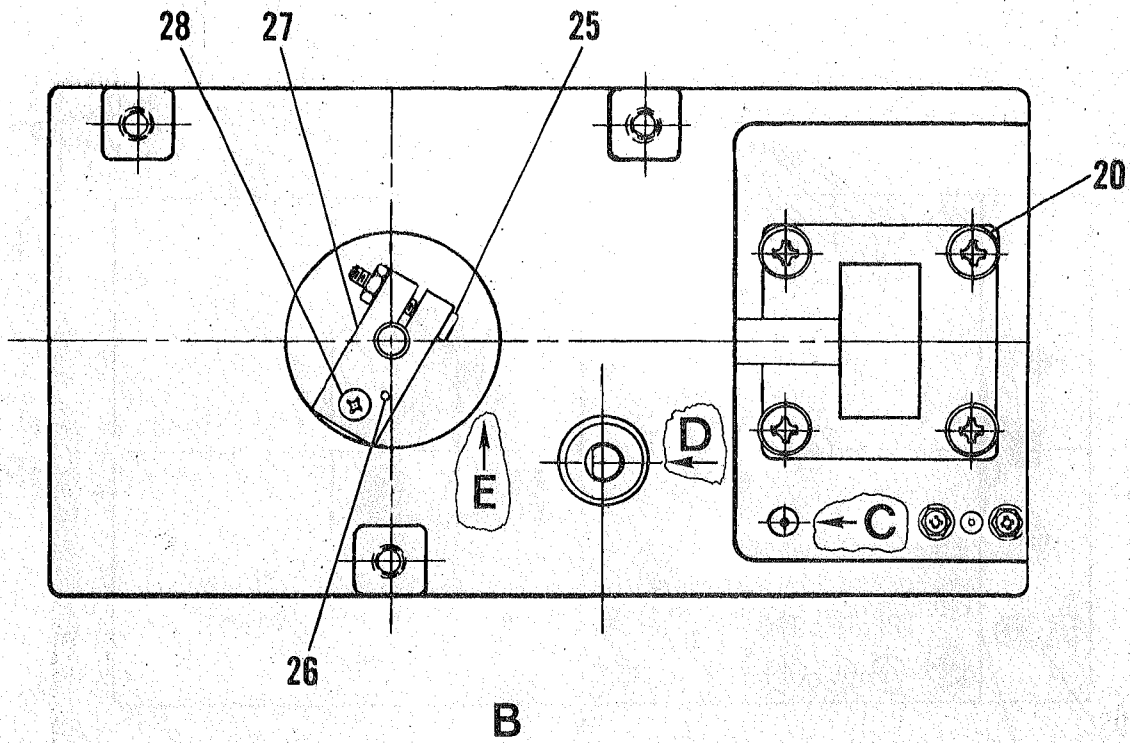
RF Oscillator Assembly (Sheet 2 of 3)
